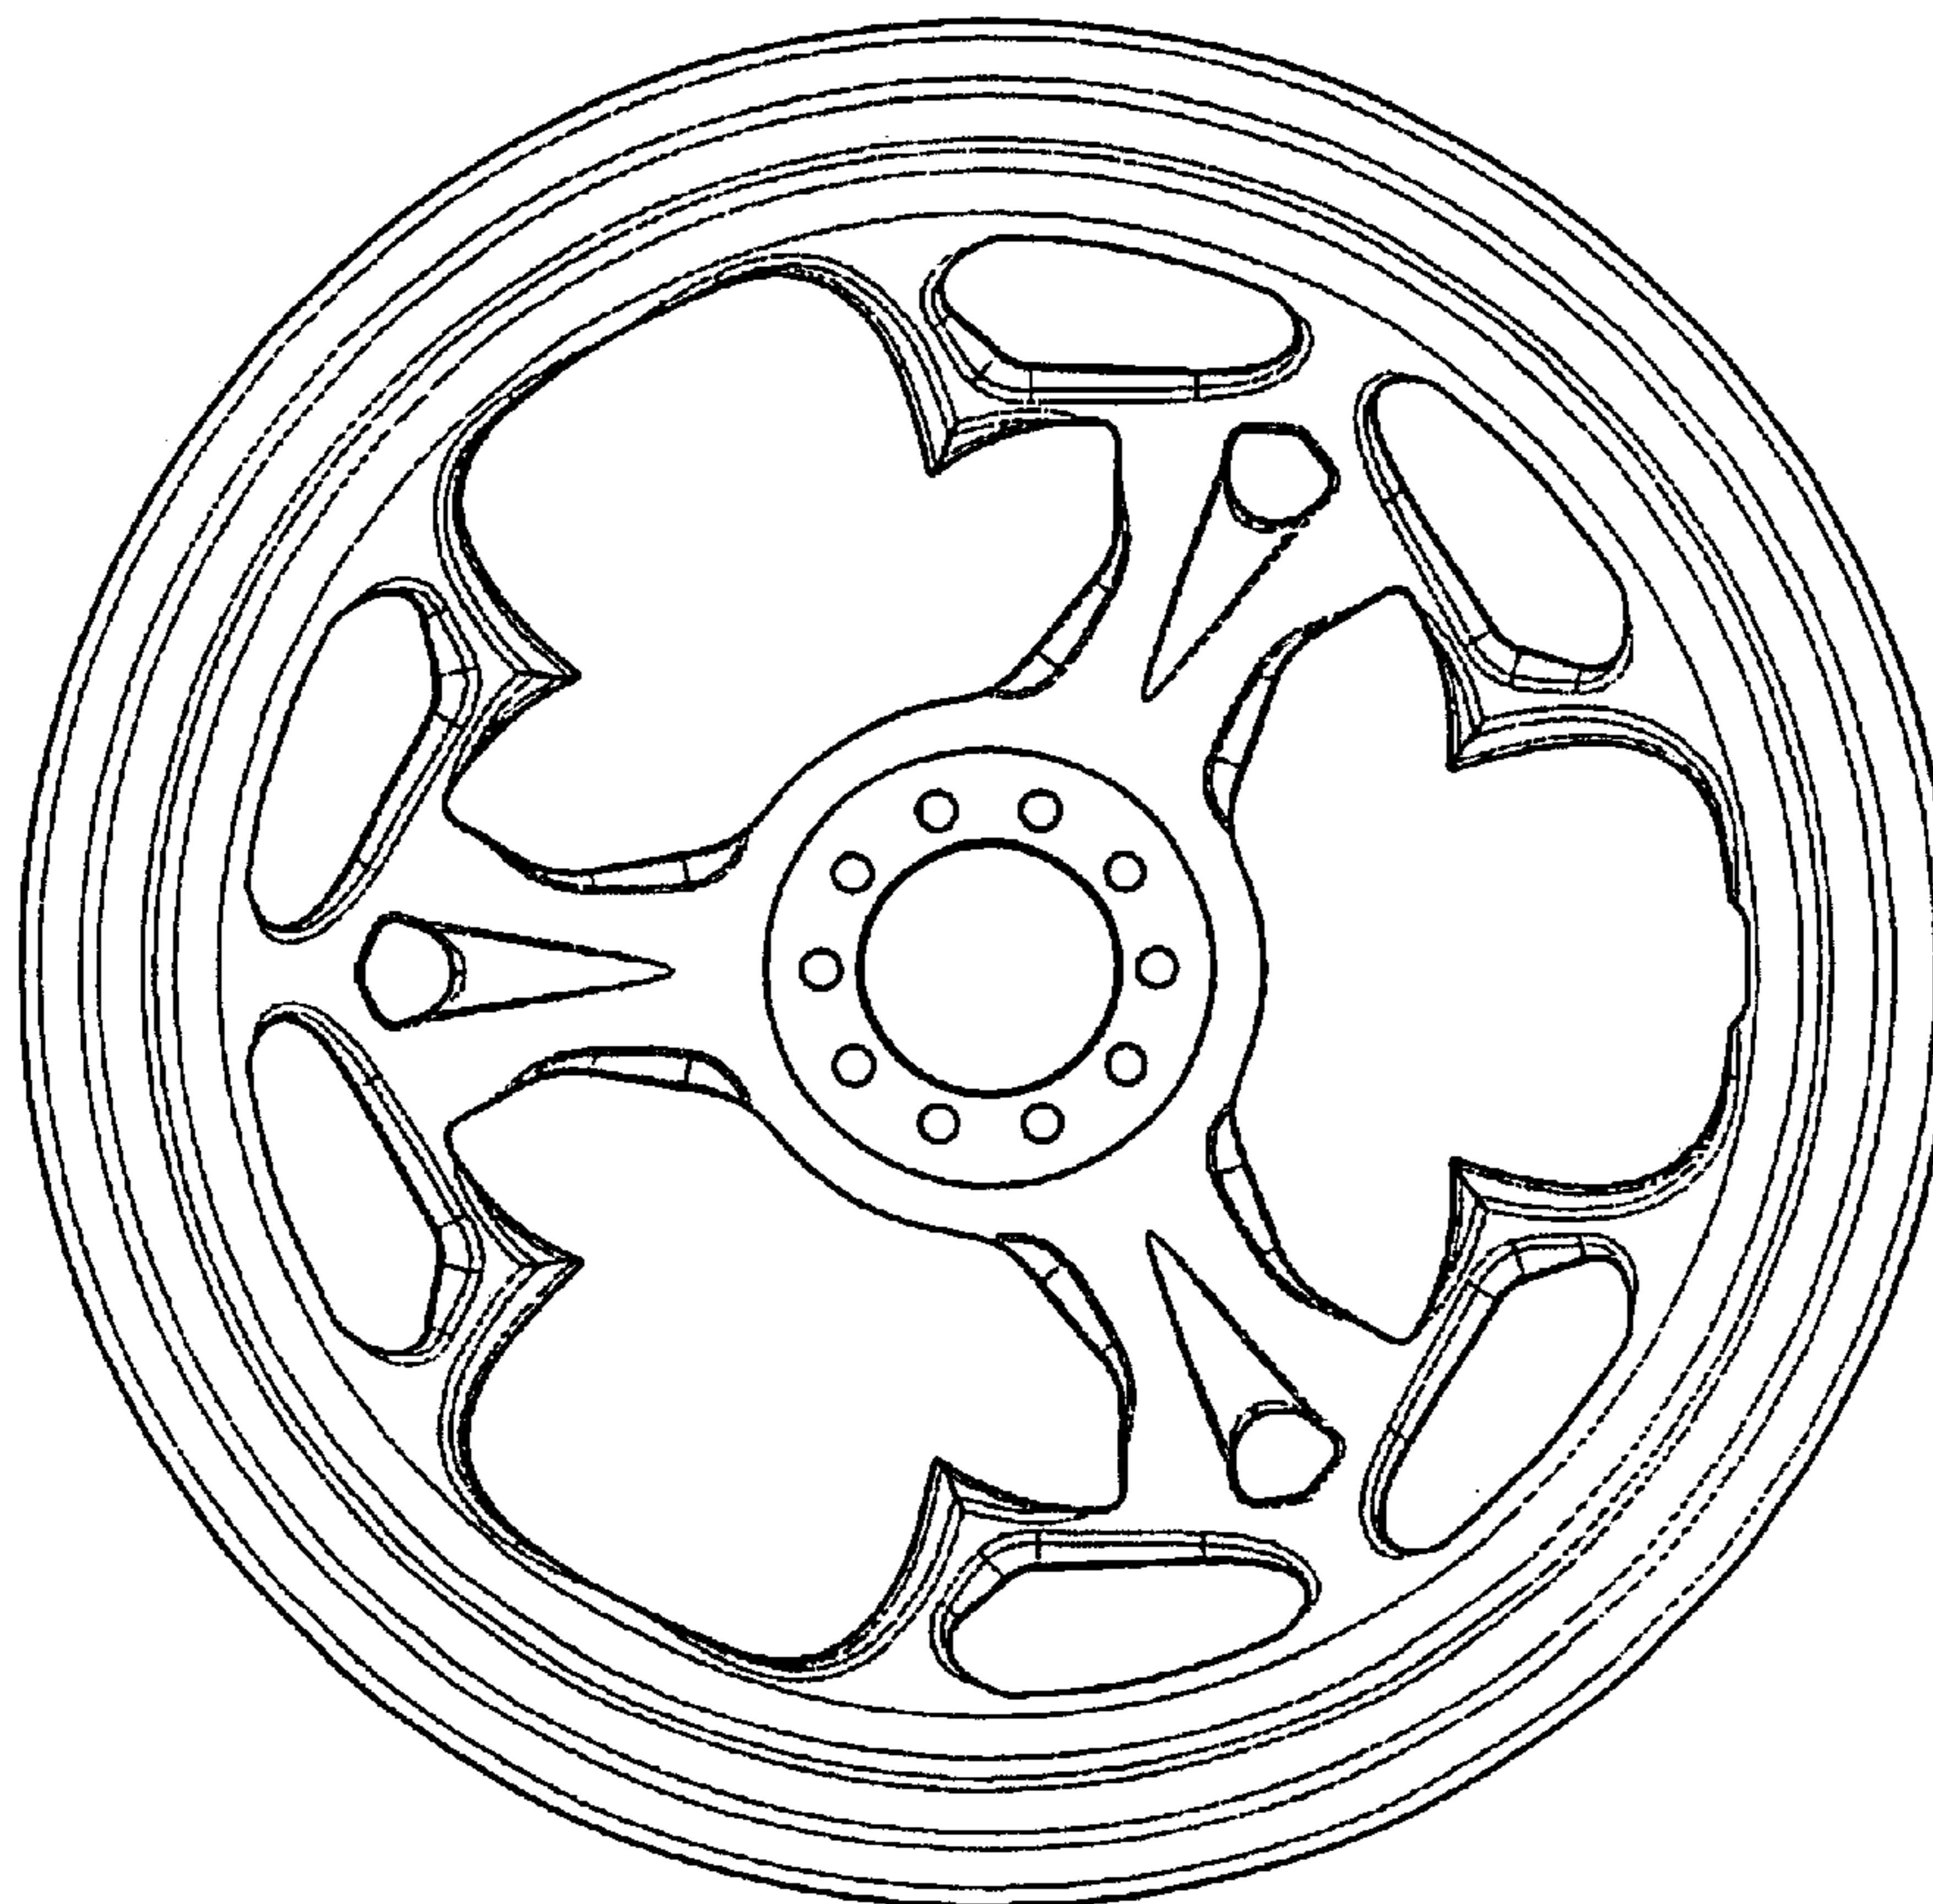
is a front view of a second embodiment of a wheel in accordance with the invention, the back view is a mirror image of the front view;
